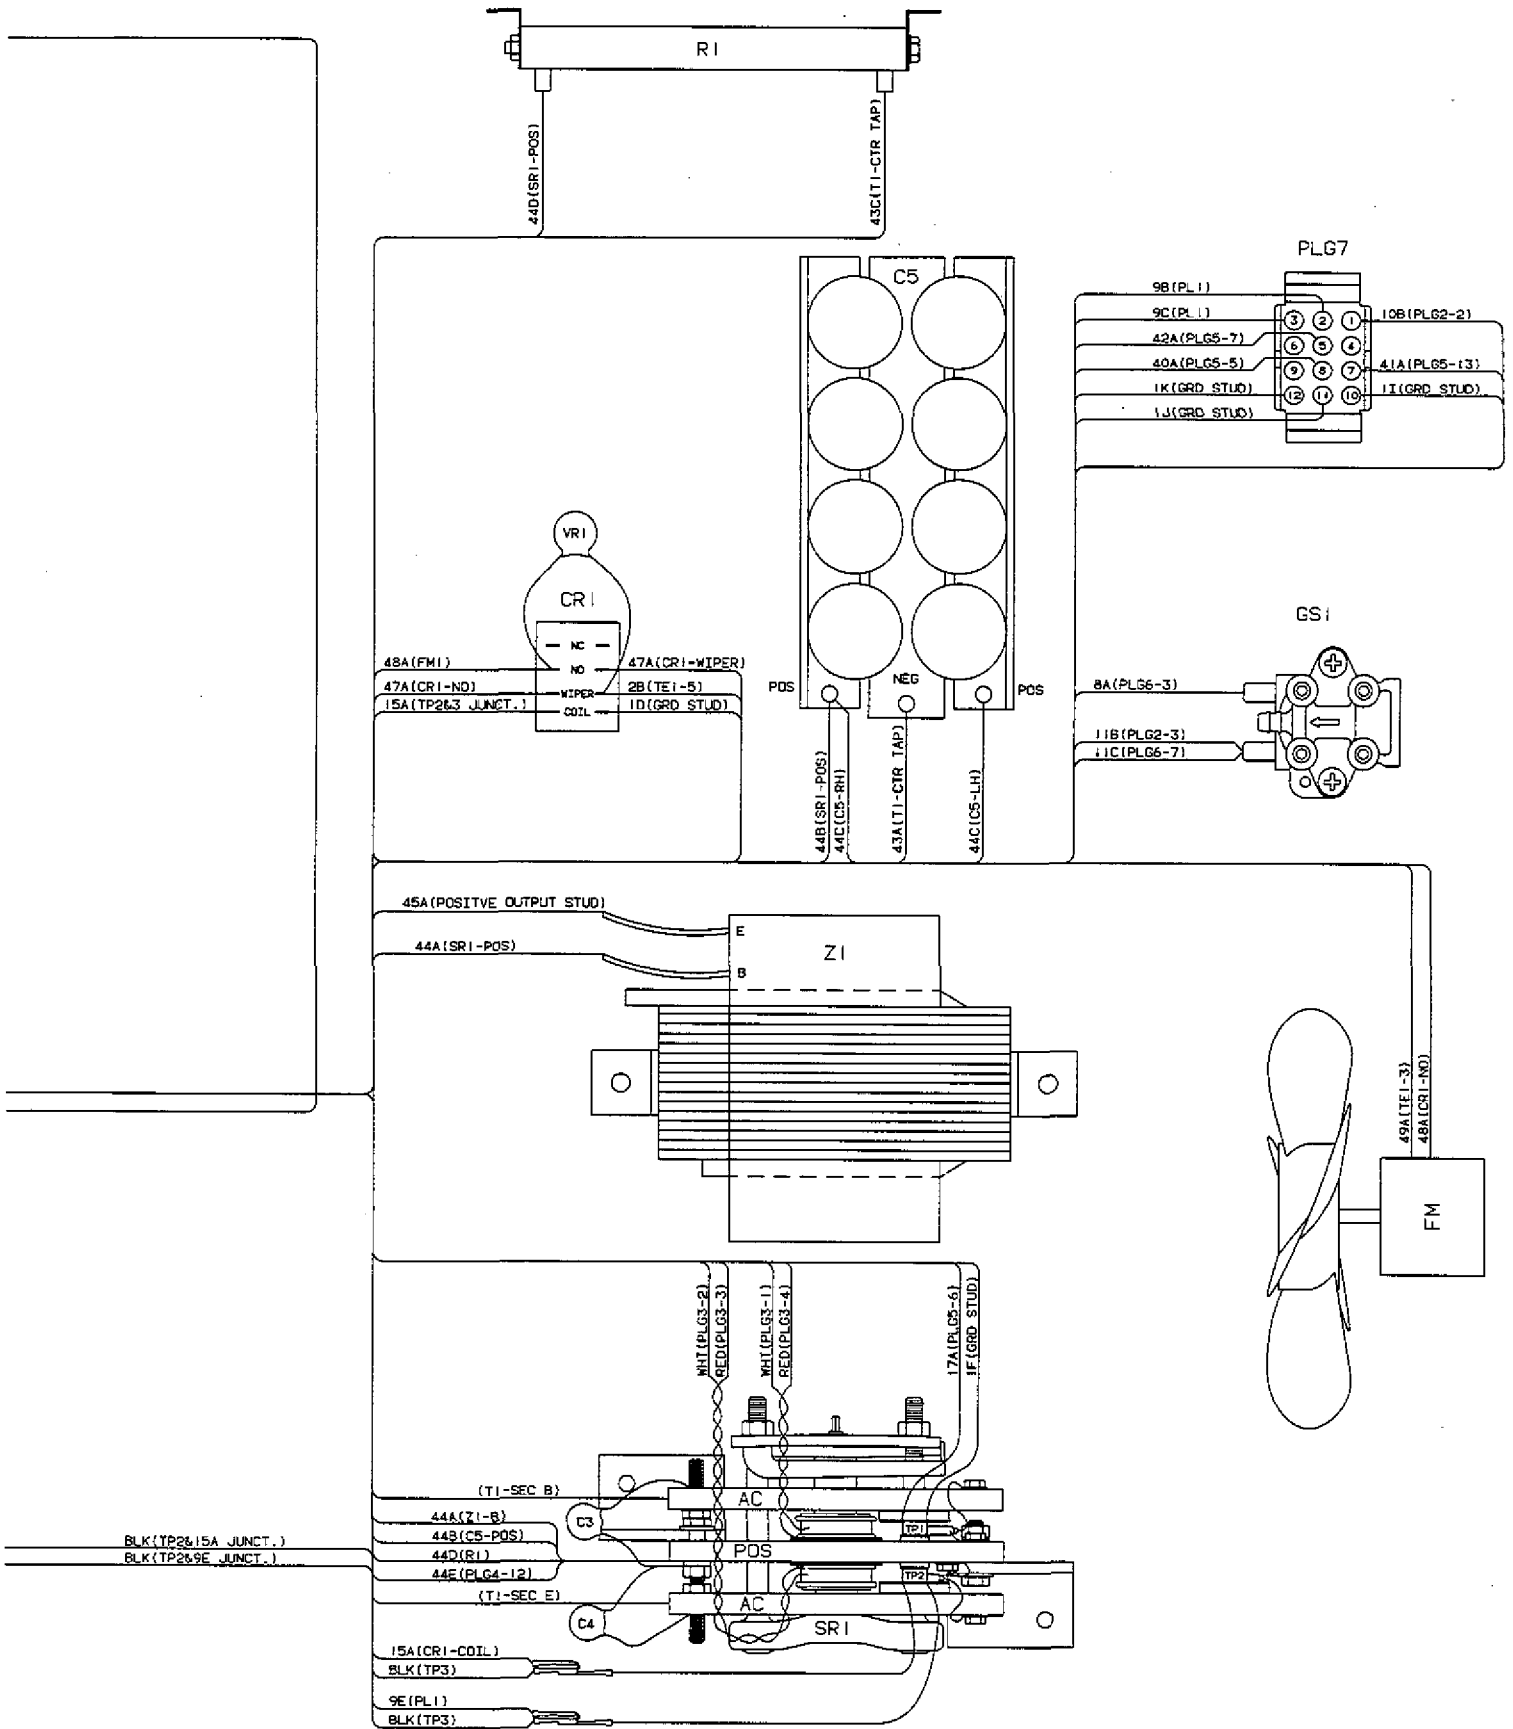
Wiring Diagram For Welding Power Source
